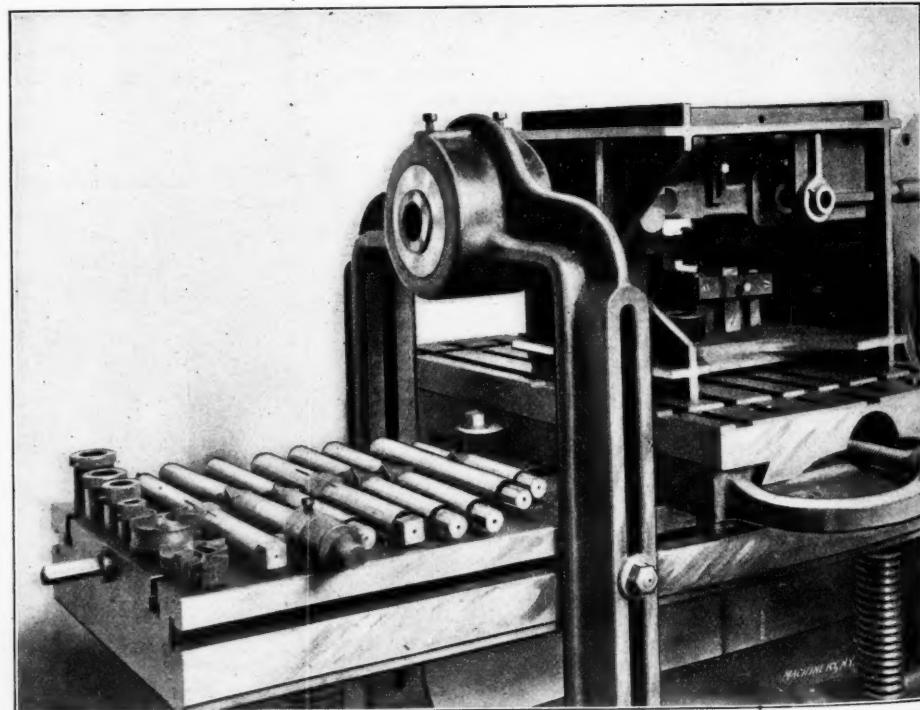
Tools and Fixtures for Boring Feed Screw Bracket, No. 5 Vertical Milling Machine.
